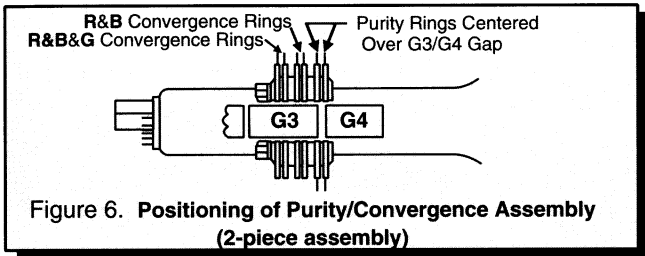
Positioning of Purity/Convergence Assembly (2-piece assembly)
